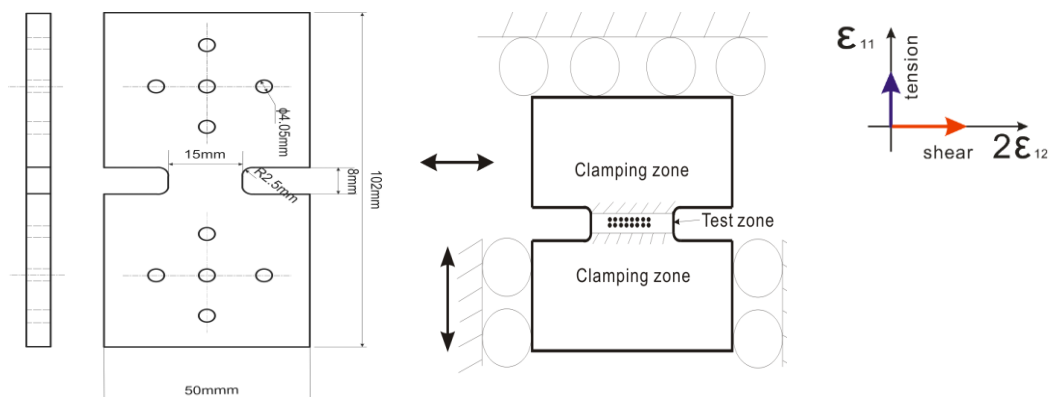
Drawing of the specimen geometry and loading method for CL tests.
